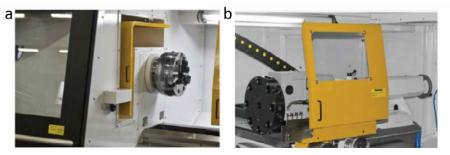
(a) Head of the lathe; (b) Fairing of the lathe.
